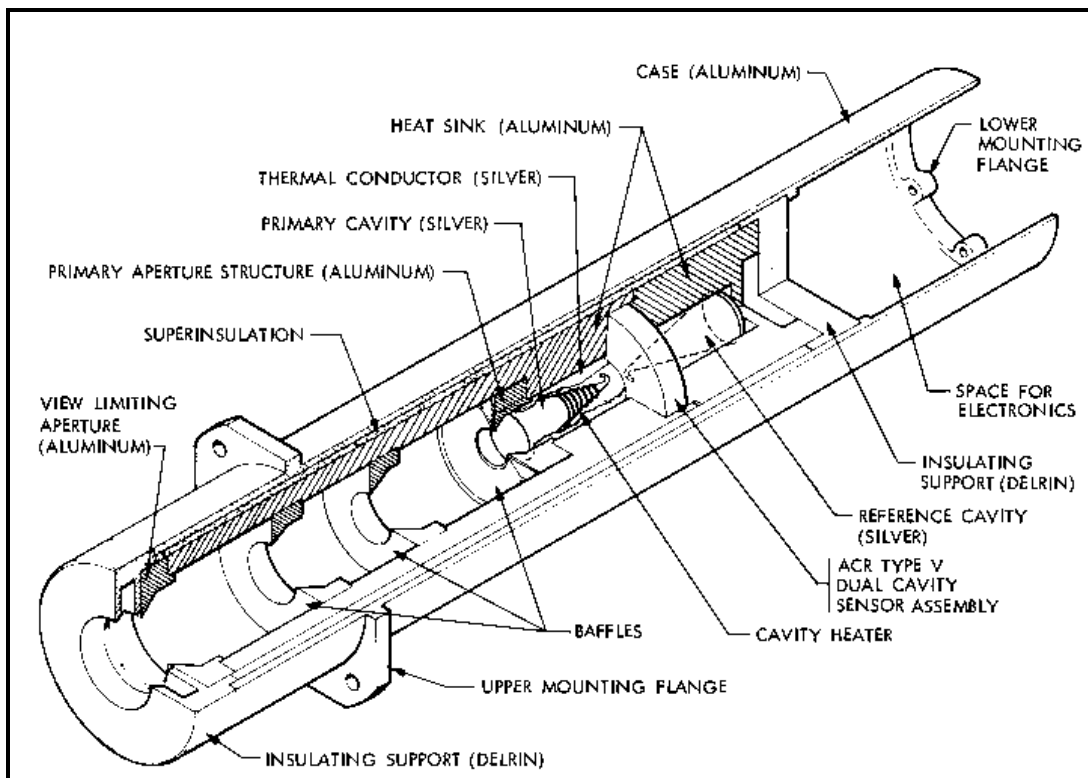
Active Cavity Radiometer modular sensor assembly.
